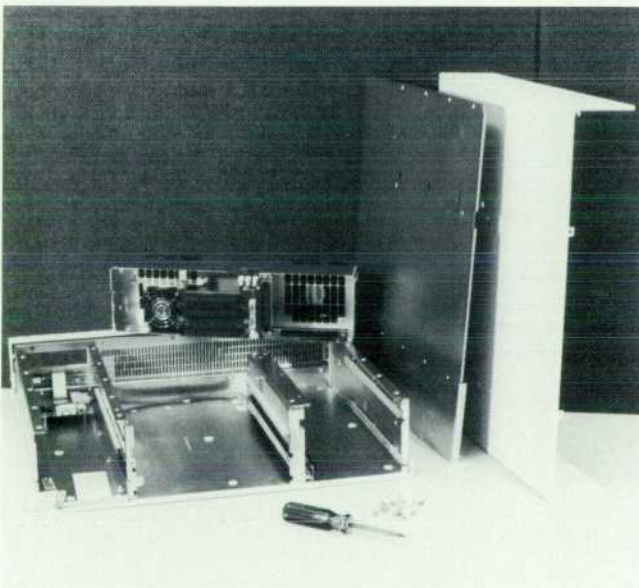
Disassembled HP 9000 Model 720/730 SPU package.
